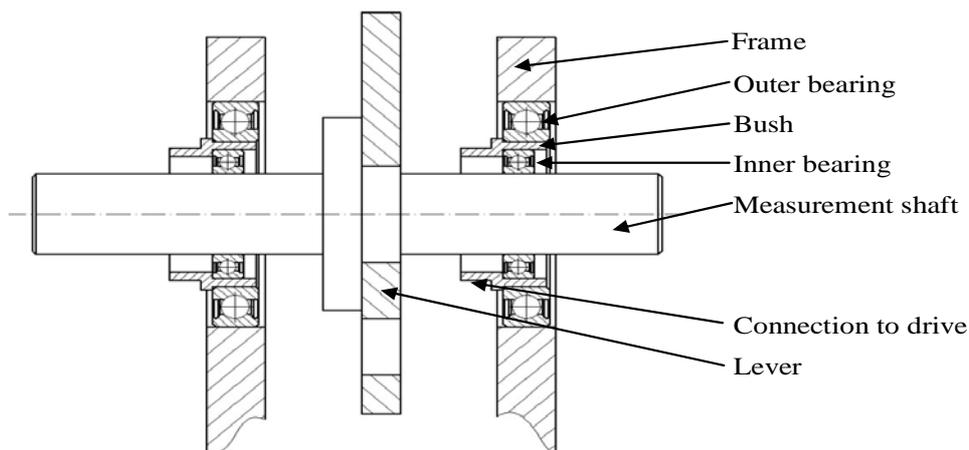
Cross-section through the counterrotating bearing in the MIKES-RAUTE 2 kN·m device (connecting parts such as screws not shown)
